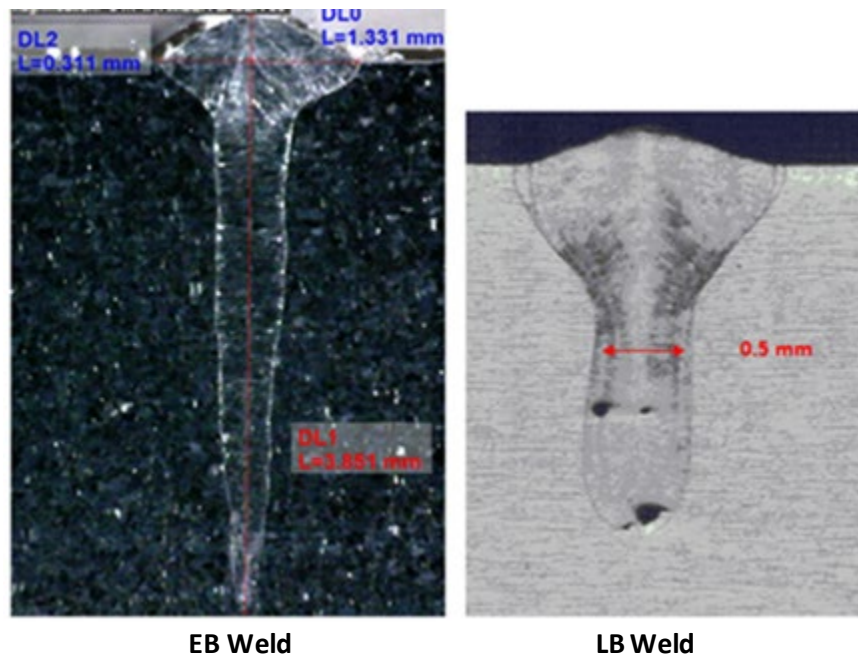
Welds made in stainless steel using the measured beam profiles shown in Figure 5. Both welds were made with 1000W of beam power; sharp focus; 60 ipm travel speed. Weld data is from: “Considerations for Transitioning EB Welds to Equivalent LB Welds”, A. Black, A. Duffield, P. Burgardt and B. Preston, AWS Professional Program (2018) and accompanying internal LANL report.
